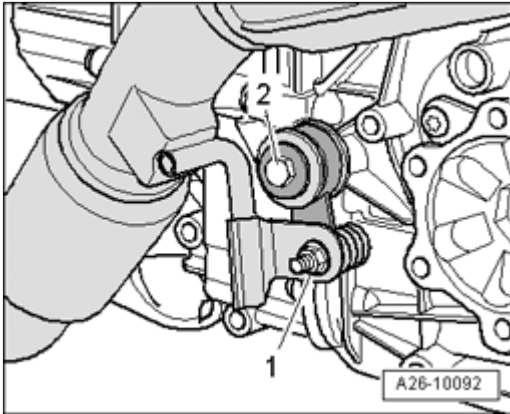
Removing Bolt At Right Bracket For Front Exhaust Pipe
